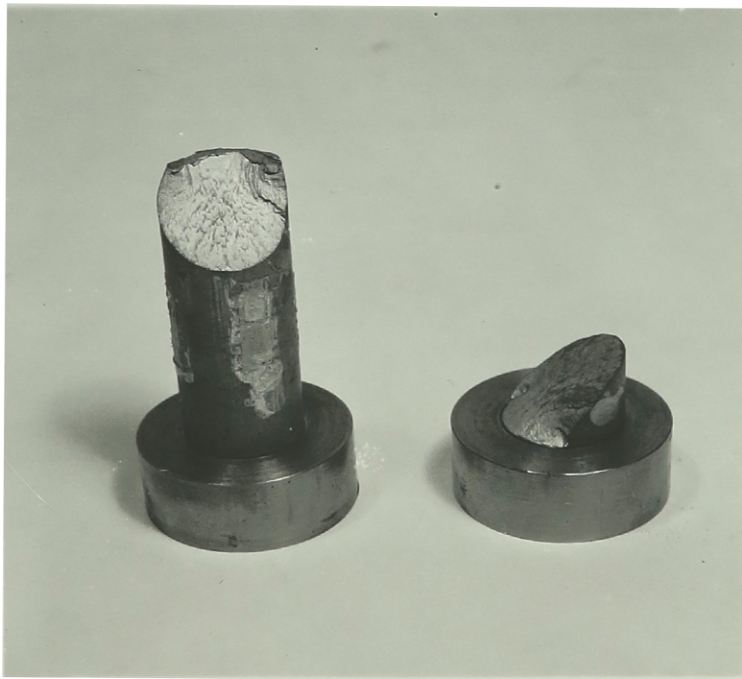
MAGNESIUM COMPRESSIVE FRACTURE
